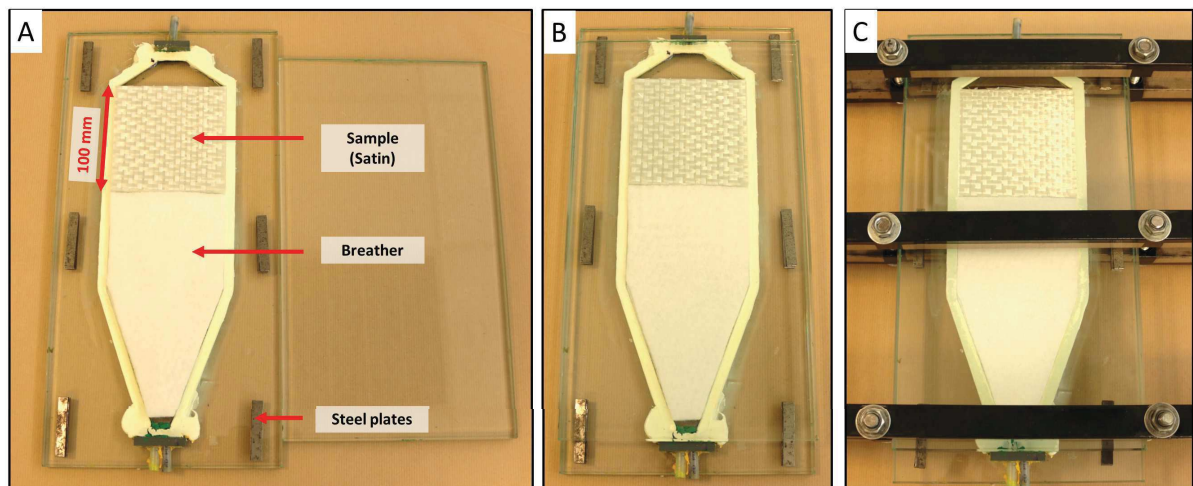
A: Mold with Breather, the fibrous sample and thickness plates, B: Mold closed, C: Mold with the clamping system
